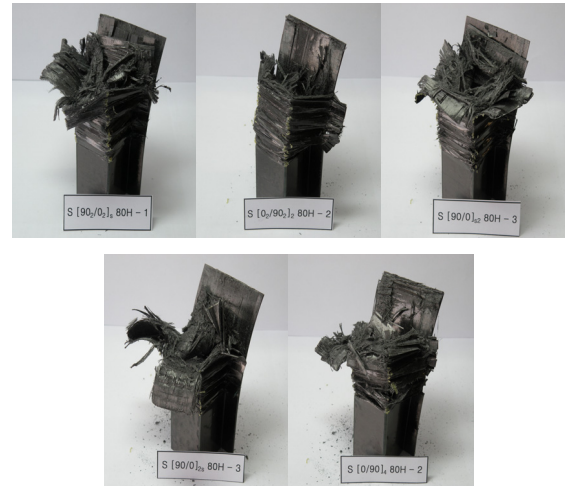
Collapsed shaped of CFRP hat-shaped sectional members (outer angle 90°, 80 °C specimen)
